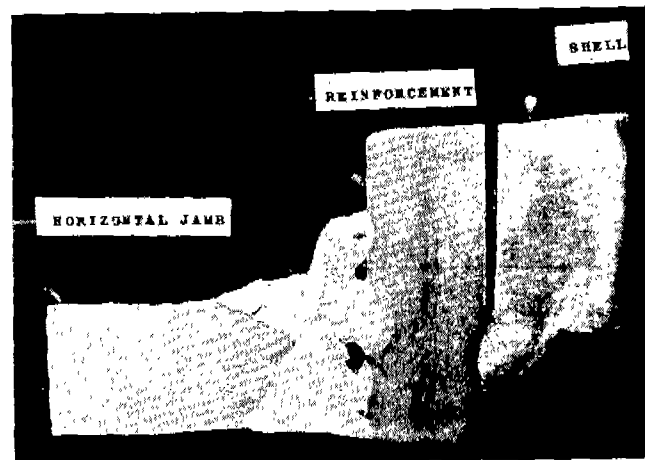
Section through horizontal cleanout door jamb in failed crude oil storage tank. Note poor quality of welding as evidenced by cavities
